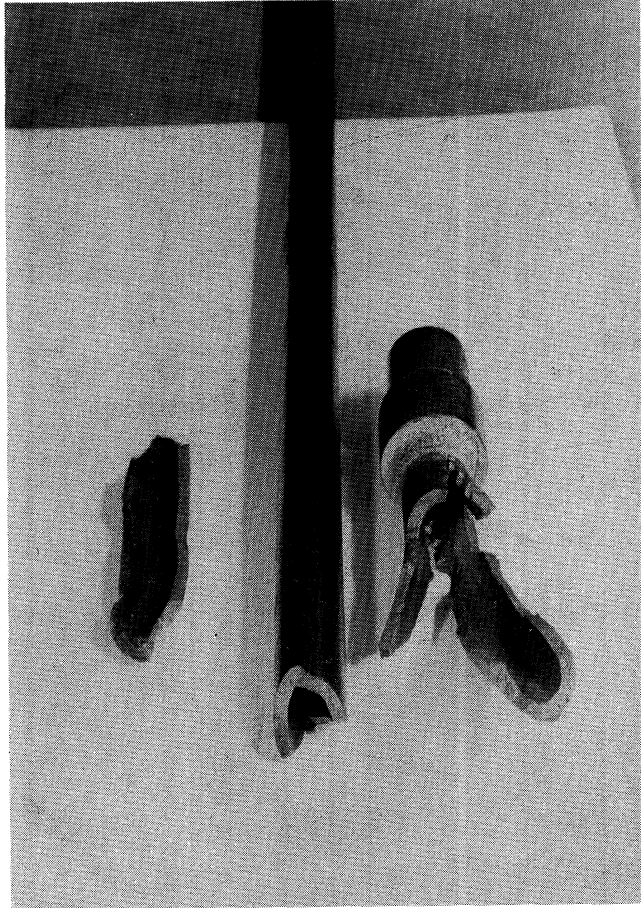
Photograph of Pressurizing Tube After Accidental Explosion.
